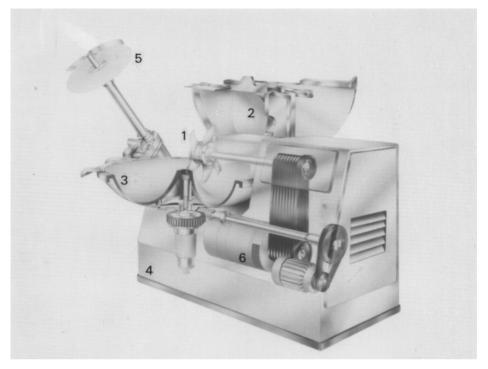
Bowl chopper: 1, cutting blades; 2, cover; 3, rotating cutter bowl; 4, casing; 5, rotating unloader disc; 6, main motor. (Courtesy of Hoegger Alpina Ltd.)
